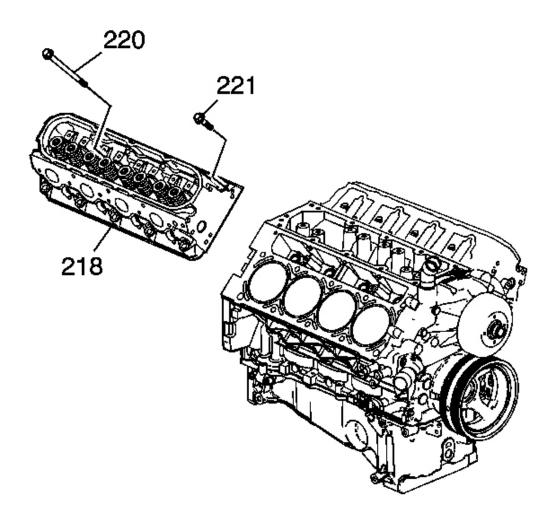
Cylinder Head Courtesy of GENERAL MOTORS CORP.
